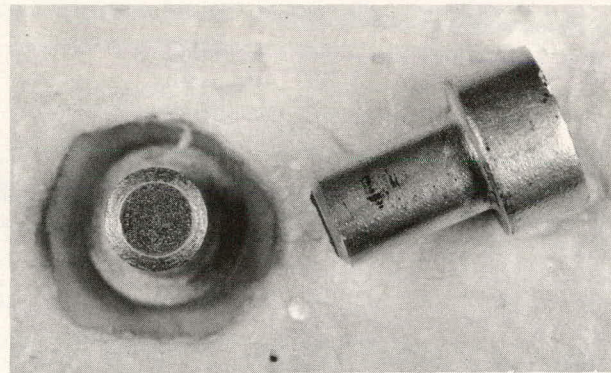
Fracture Surface of Irradiated 212-B Specimen 7 (High Charge); Tensile Test
